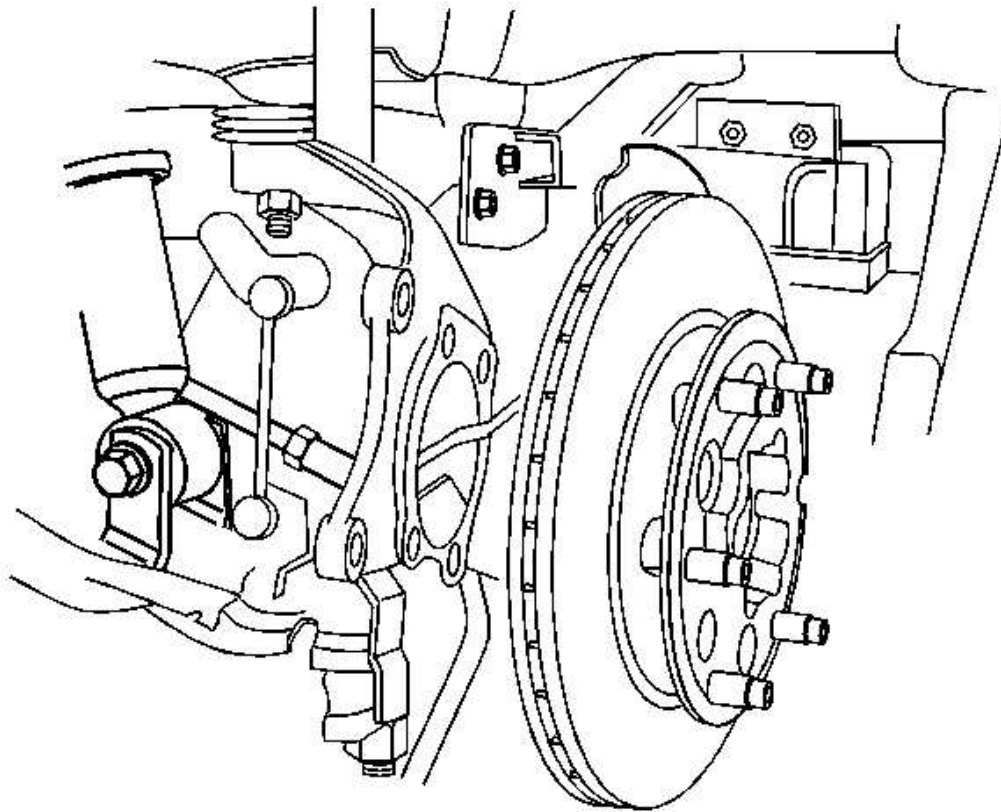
View Of Wheel Hub/Speed Sensor Assembly
